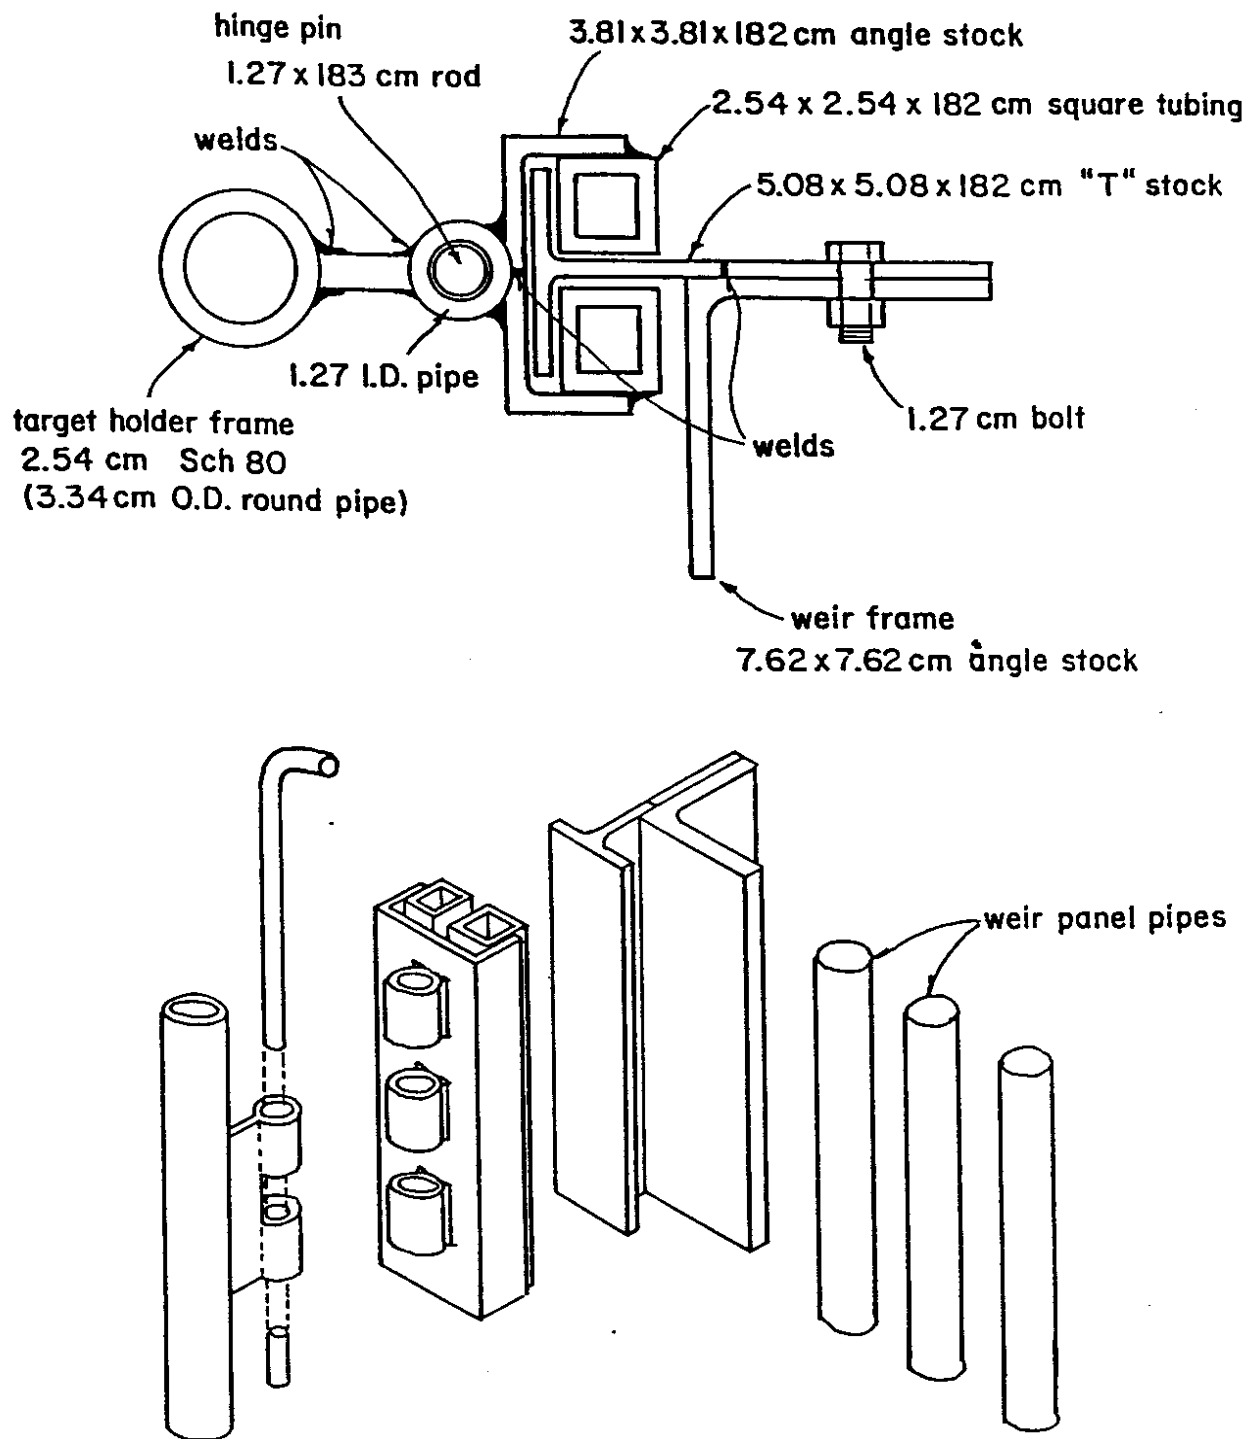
Hinge and slide receiver connecting the target frame to the weir.
